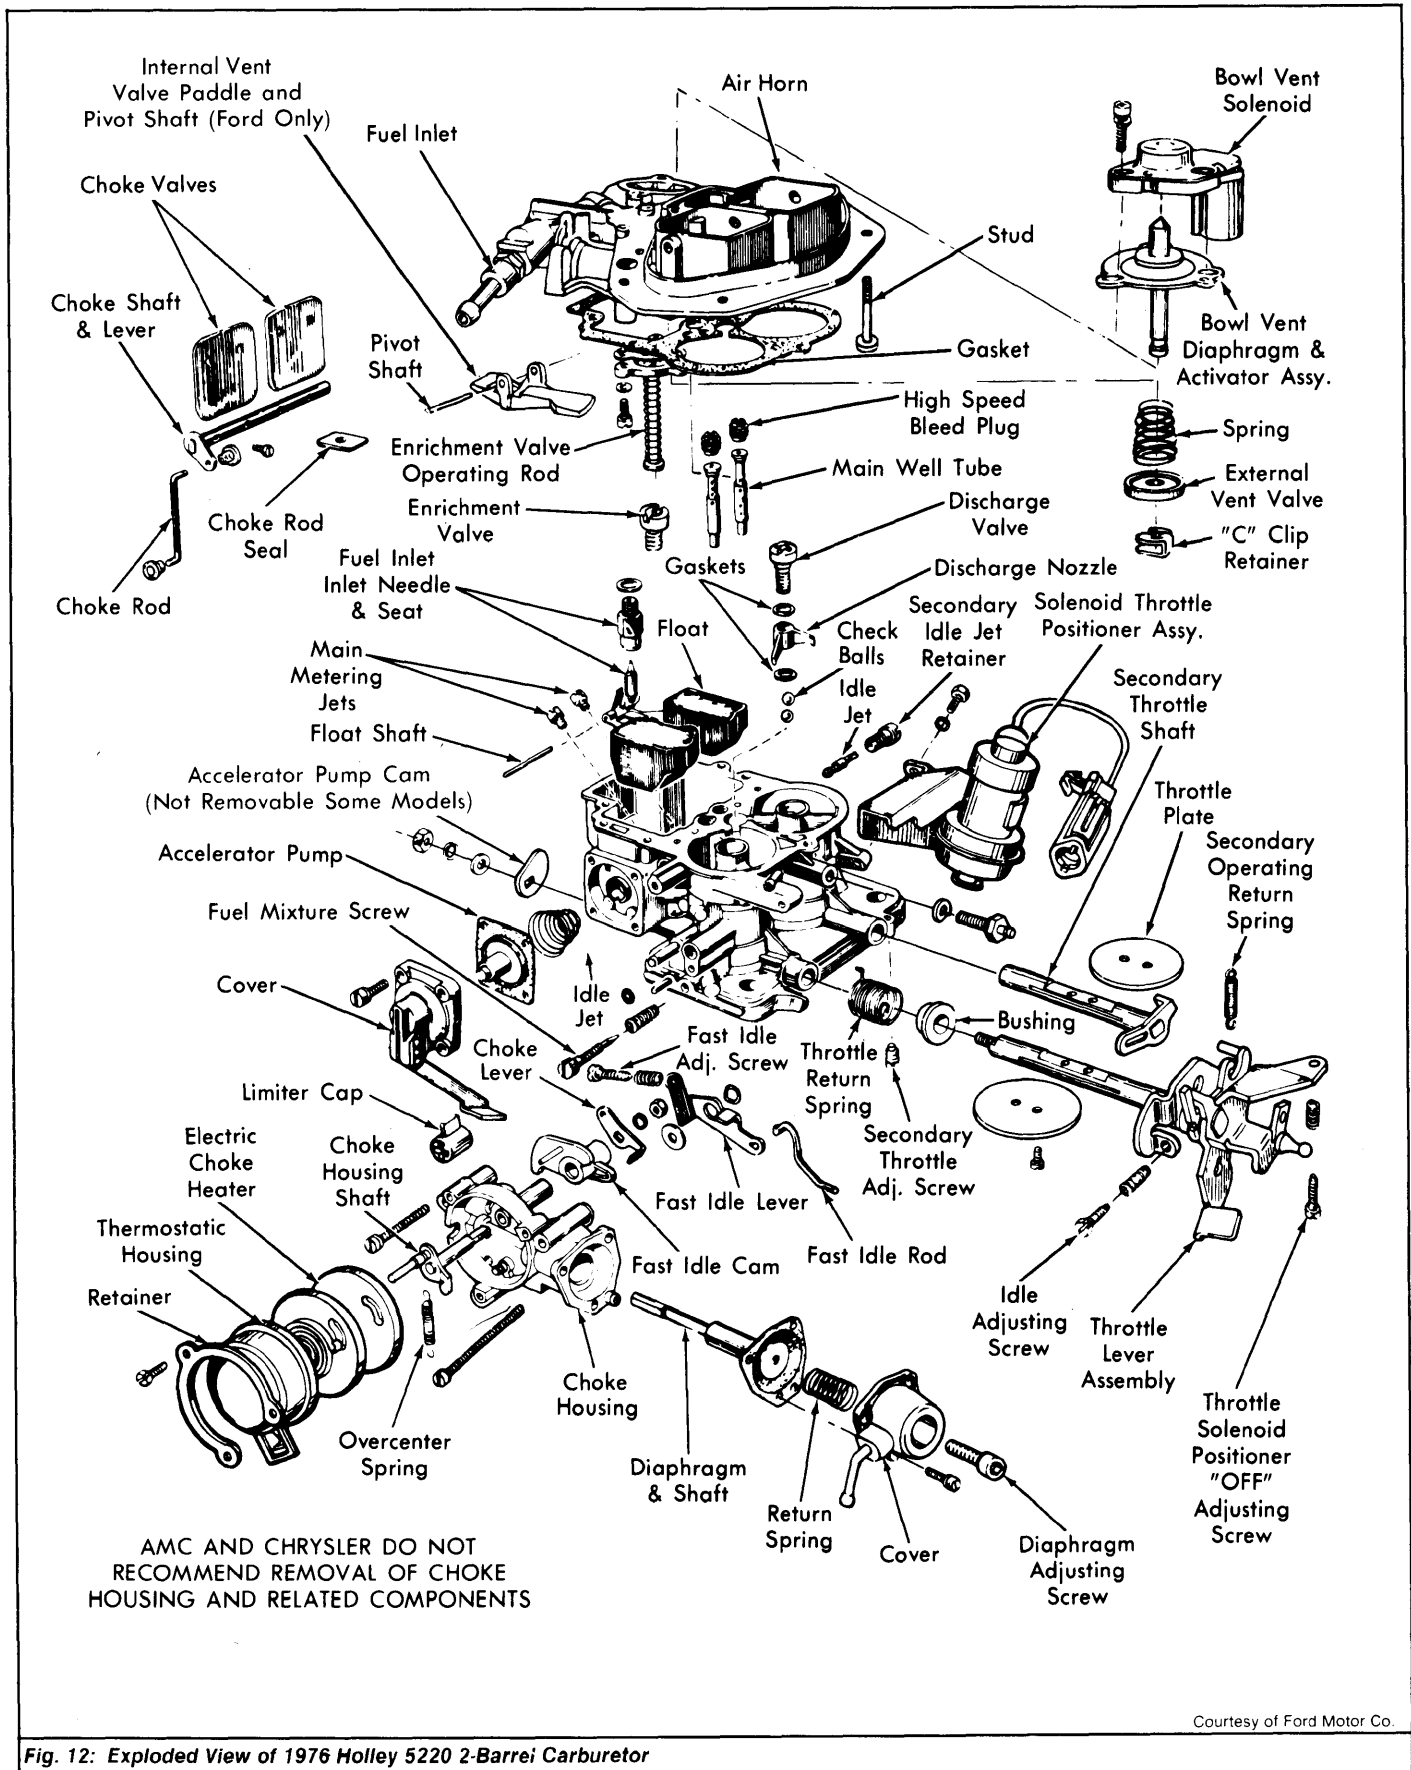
Exploded View of 1976 Holley 5220 2-Barrel Carburetor
